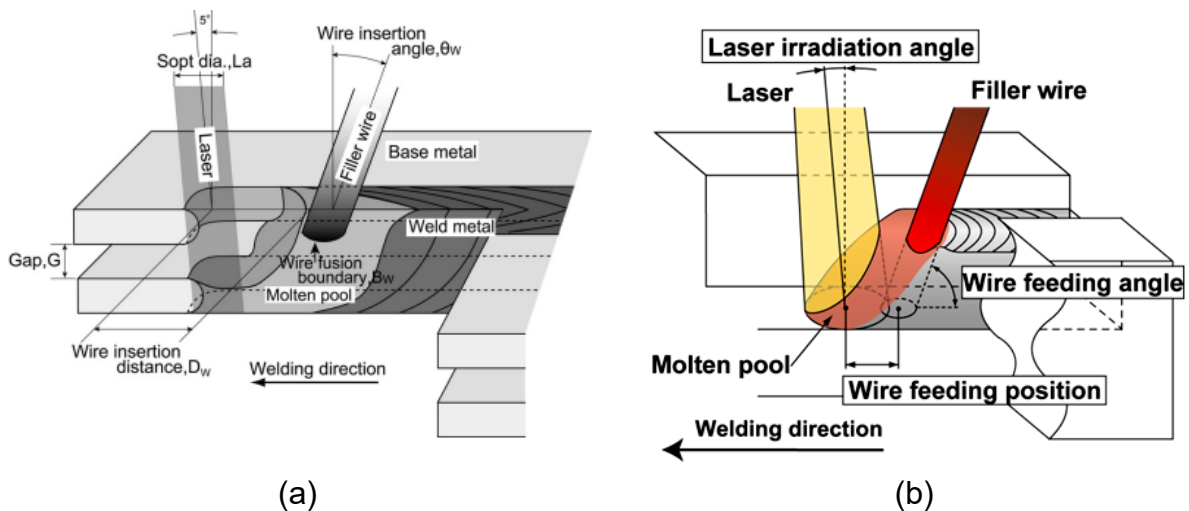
Schematic illustration of hot-wire laser welding method: (a) lap-joint; (b) narrow-gap joints [140, 141].
